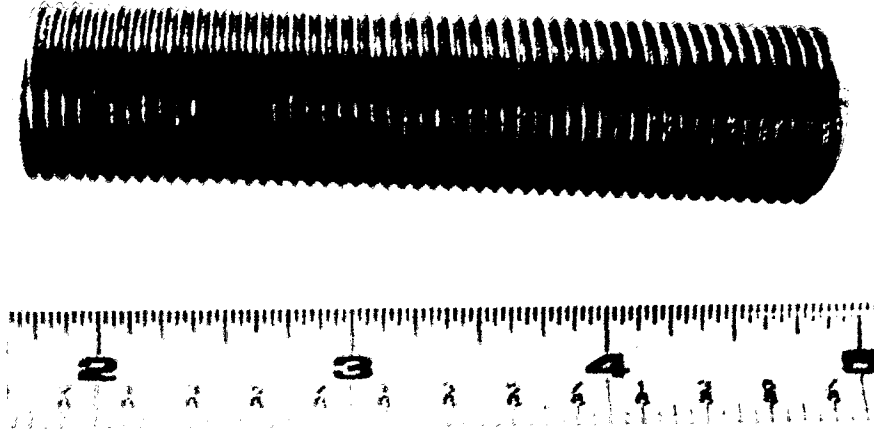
Custom fabricated stainless steel mandrel for winding tungsten wire into a coil of diameter 25.4×10^{-3} m (1").
